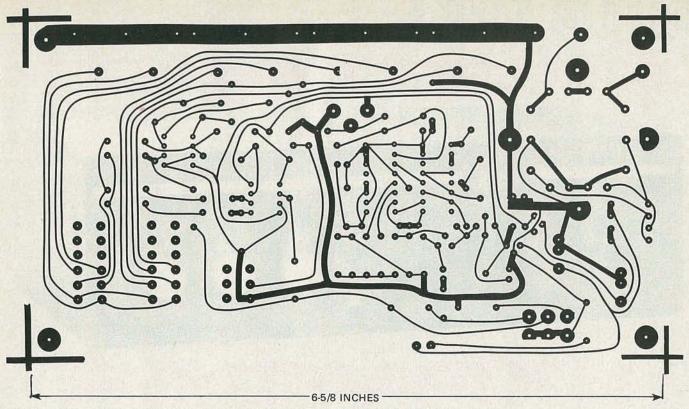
STEREO IMAGE EXPANDER is constructed on single-sided PC board. The use of IC sockets is recommended.
